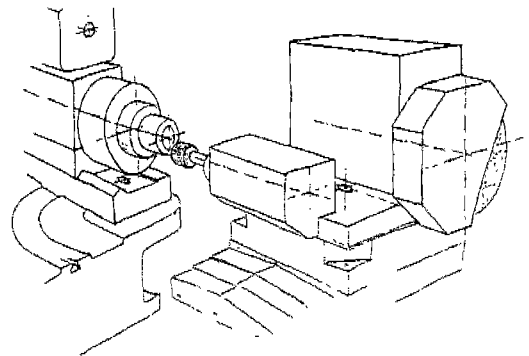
Cylindrical and internal grinding head on indexing bed
